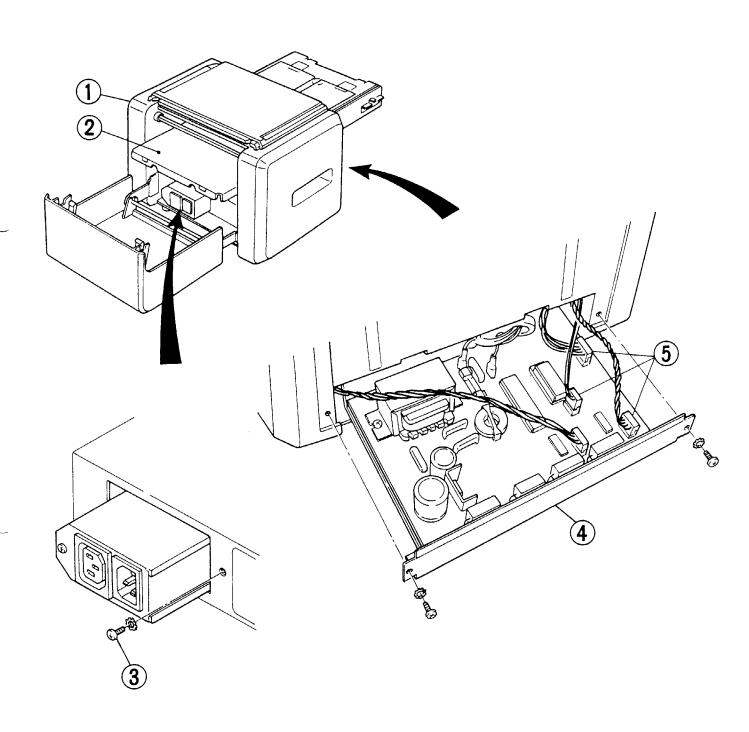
ELECTRONICS ASSEMBLY REMOVAL
